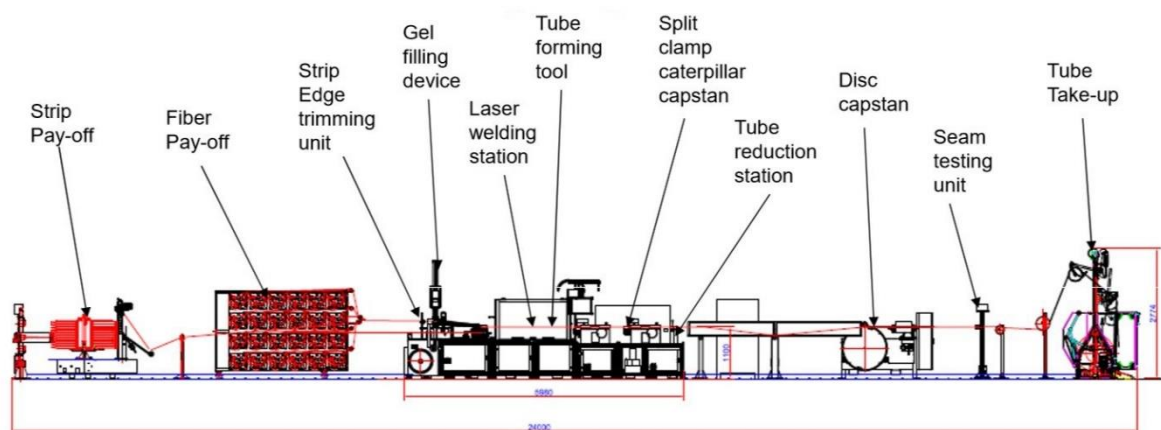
Fiber in Steel Tube production line [manufacturer Nexans - www.nexans.de]
